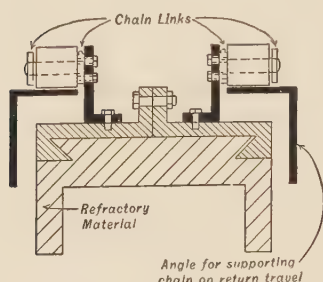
Roller chain with carrier arm of refractory material. Chain is shown in the position which it assumes on the return travel under the furnace.
